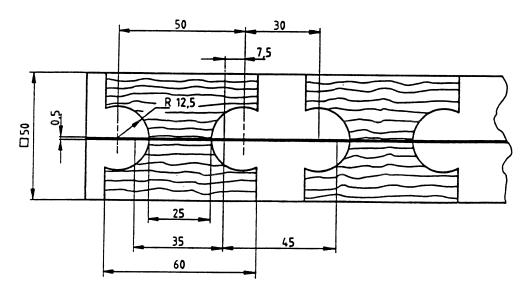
Tensile test pieces cut out of the bonded wooden assembly
